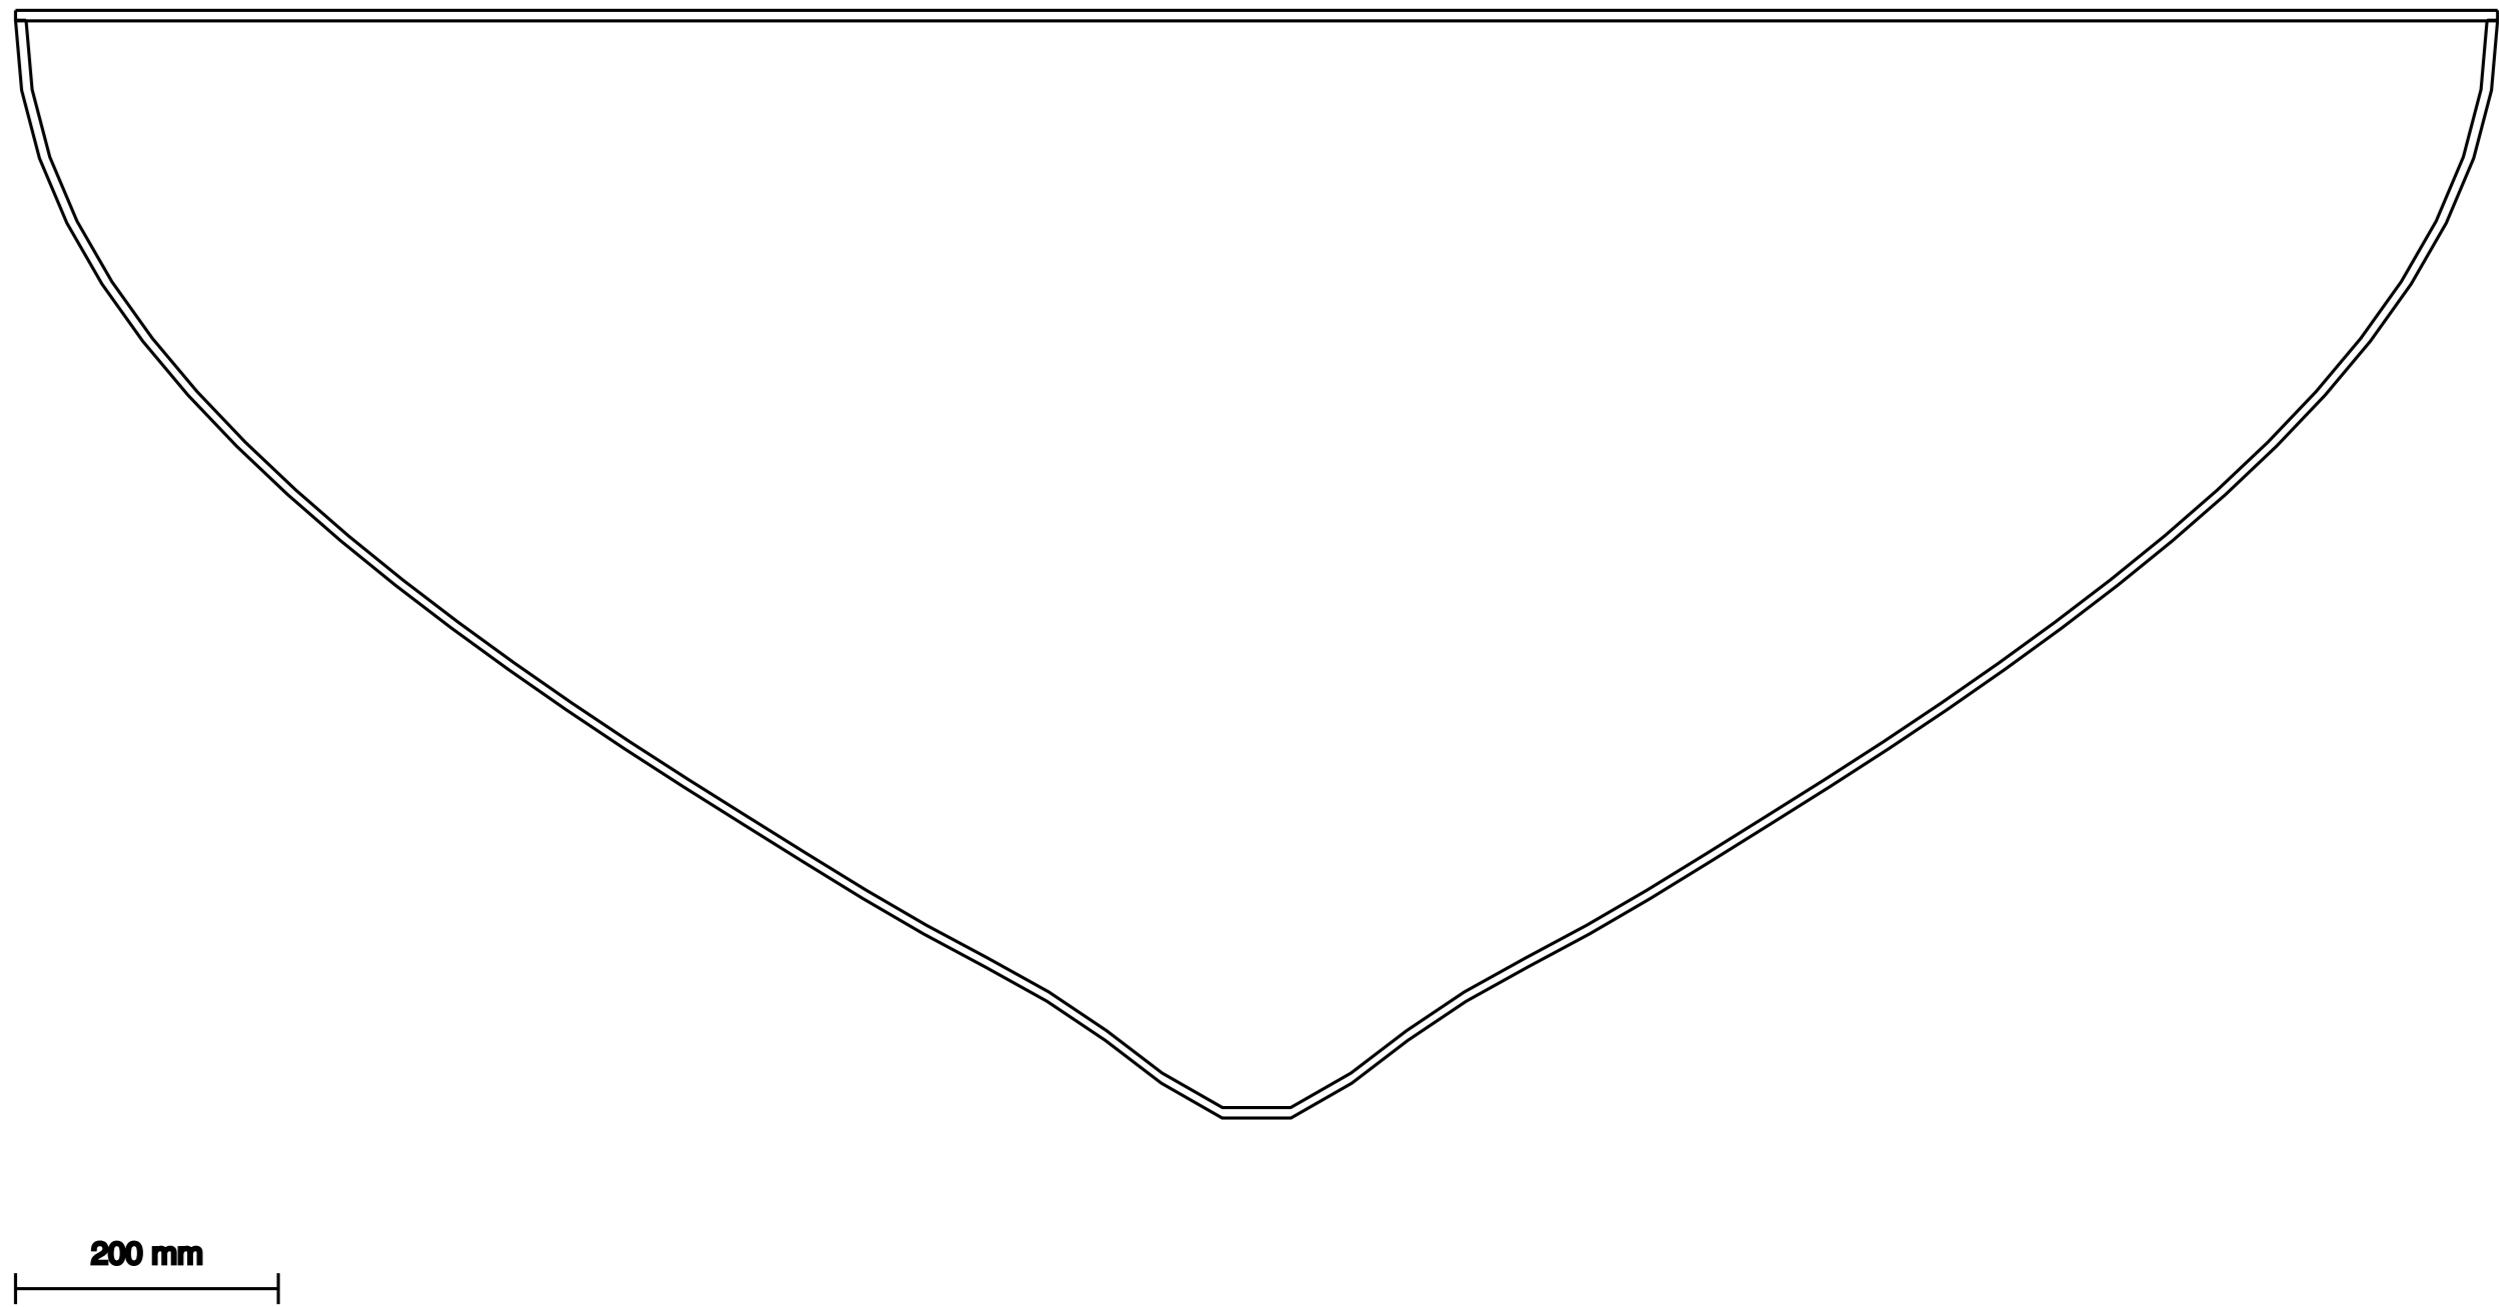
Body Plan—Section at stn_4 (Y=1017mm)
